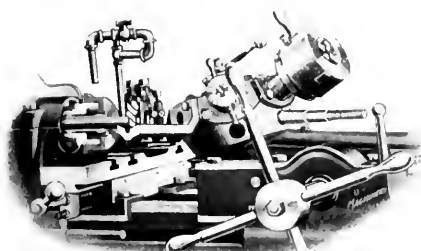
Machine equipped with the Wood Improved Stock Control Chuck
